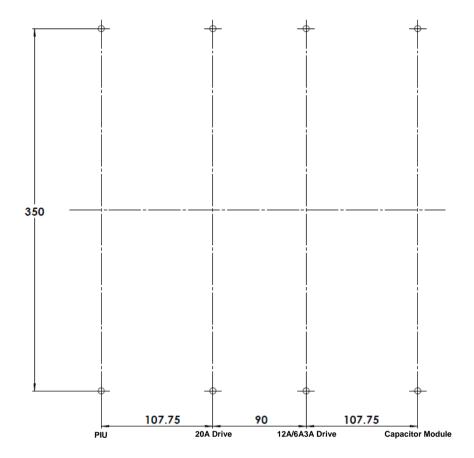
PIU, 20A and 12A/6A/3A drives heatsink cut-outs and Capacitor Module hole mounting hole positions in an array Wall mount
